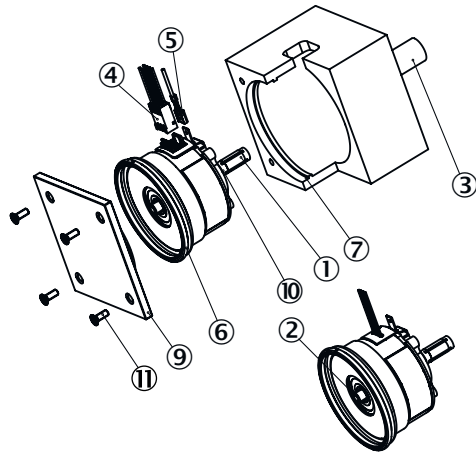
Motor feedback system with Plug-in Shaft and Rubber Support
